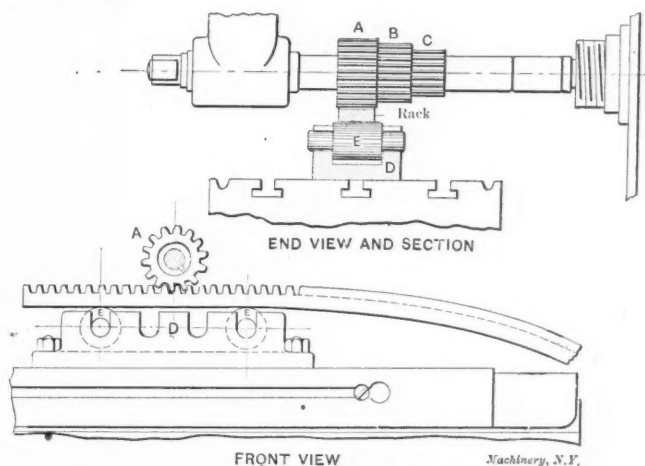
Straightening Cold-rolled Racks in the Milling Machine.
